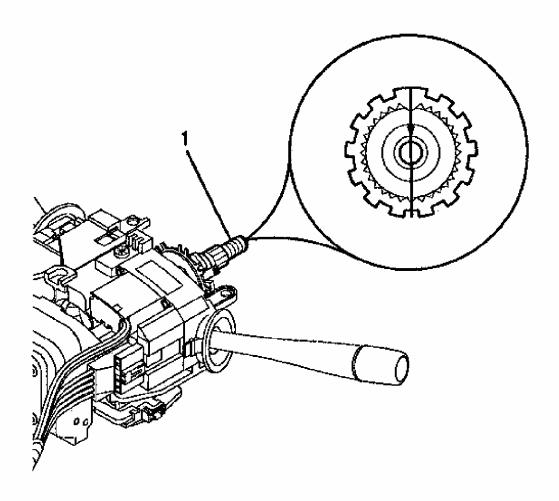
View Of Block Tooth Of Steering Shaft Assembly In 12 O'clock Position Courtesy of GENERAL MOTORS CORP.
